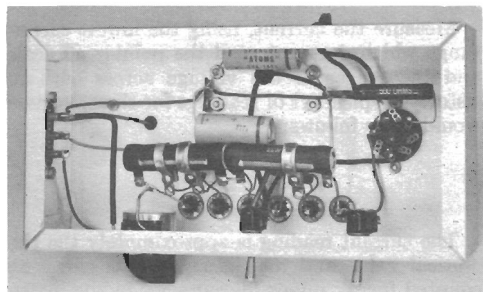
Inside the chassis of the transformerless power supply. Any convenient layout of components may be used. In this case the two slider-type adjustable resistors, R_2 and R_3 , are supported from the pin jacks by stiff leads; in mounting these resistors, leave space between them and the chassis so air can circulate around them for cooling. Use flexible leads from the sliders to the pin jacks to which they are connected, with enough lead length to permit adjustment of each slider.
